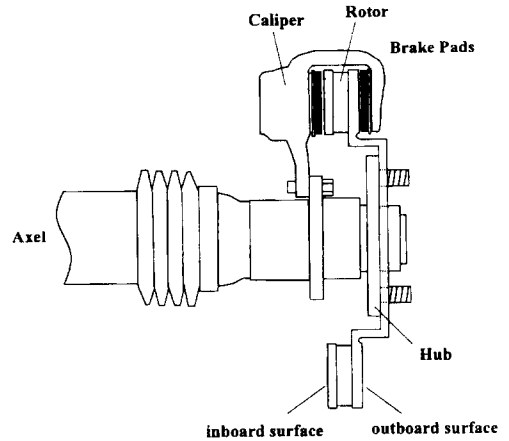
A schematic diagram of the front brake assembly used in this experiment.
